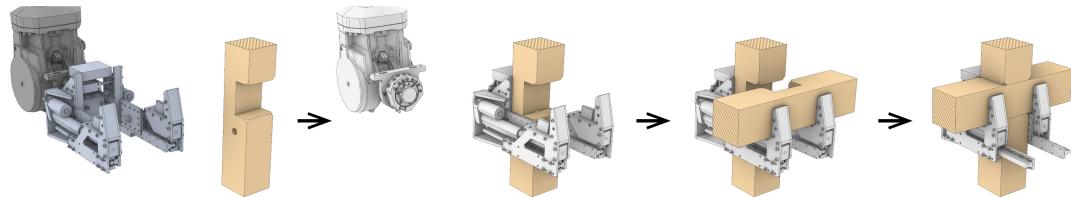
Assembly process of one timber joint using a clamp: (from left to right) A clamp being moved by a robotic arm; Clamp attached to one side of the joint; New timber element placed in clamp; Joint closure by clamp actuators.
